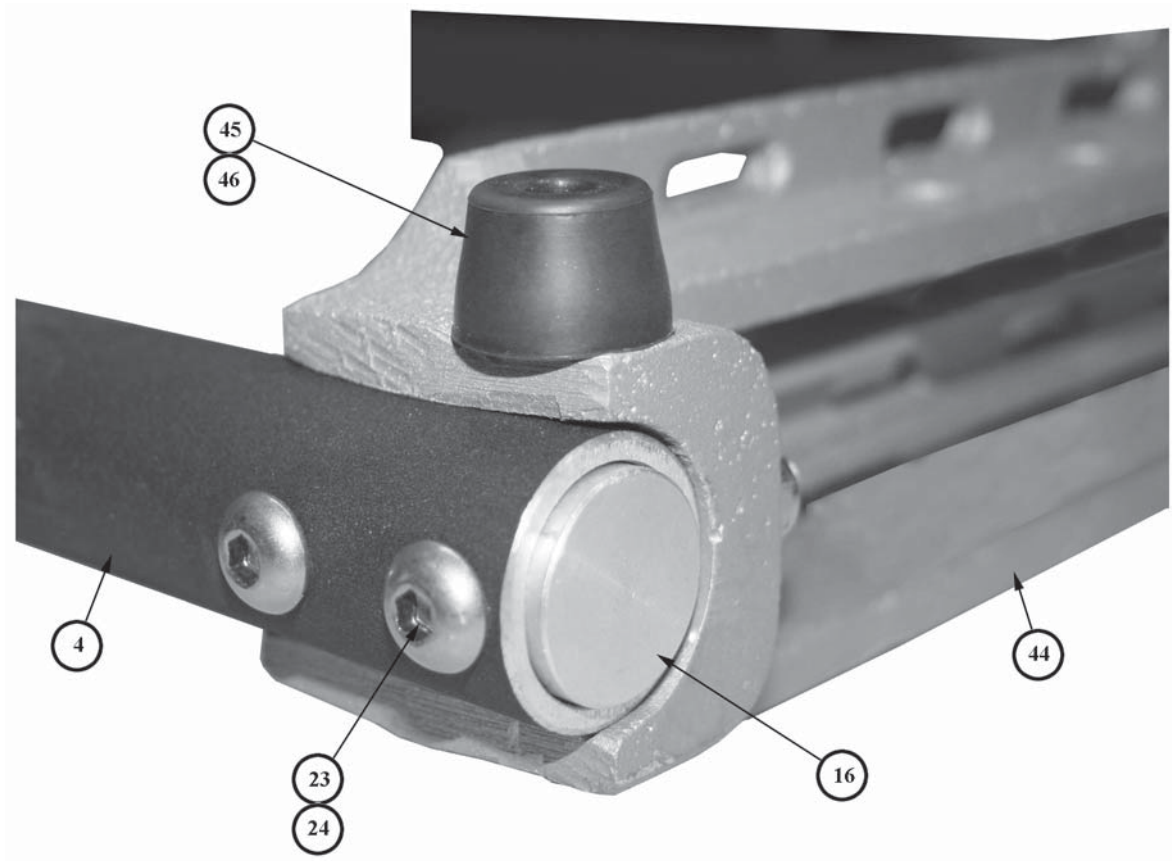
LOWER HINGE BRACKET ASSEMBLY
